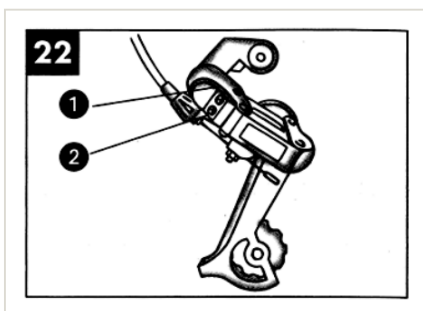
Rear derailleur: 1 screw a · 2 screw b
